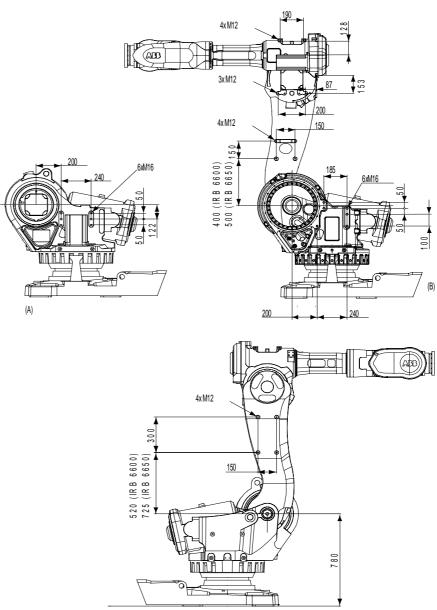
Holes for mounting extra equipment on the upper and the lower arm, and the frame on IRB 6600/ 6650 (dimensions in mm).
